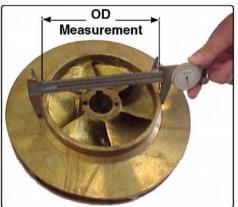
Clearance Ring and Impeller ID / OD Measurement
